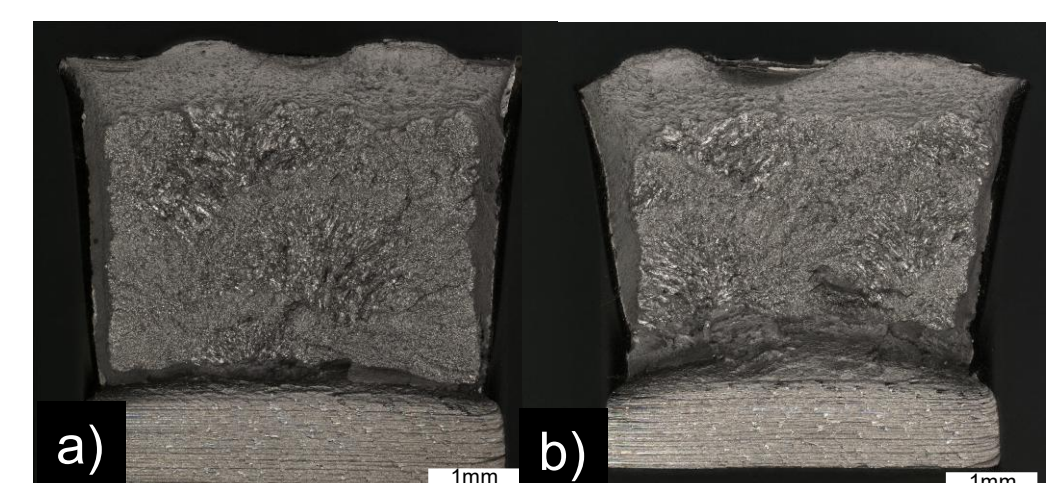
Fracture surfaces a) Blue set 1 b) Blue Set 2.
